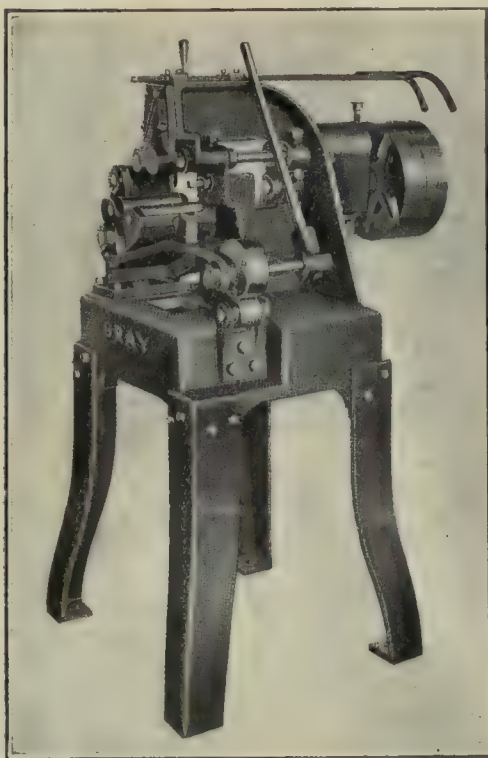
SIZE A KNURLING AND BOURRELET-ROLLING MACHINE
